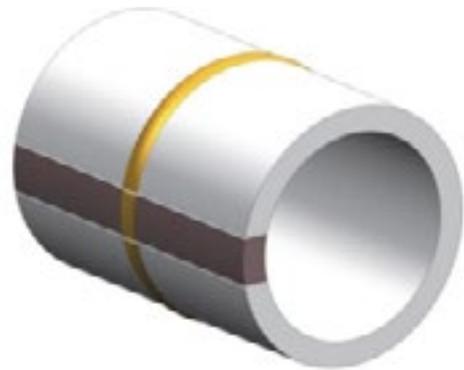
SENB Fracture Toughness geometry sample extraction from a pipe butt weld
